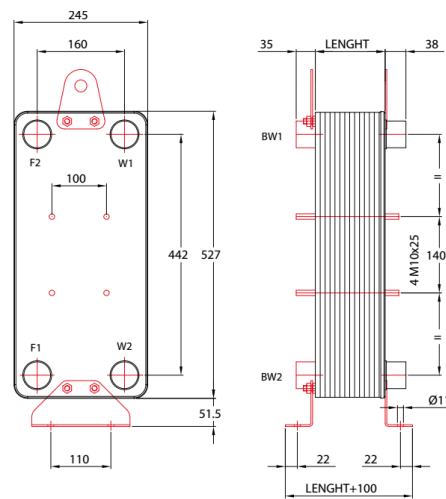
Brazed plate evaporator draw with main dimensions
